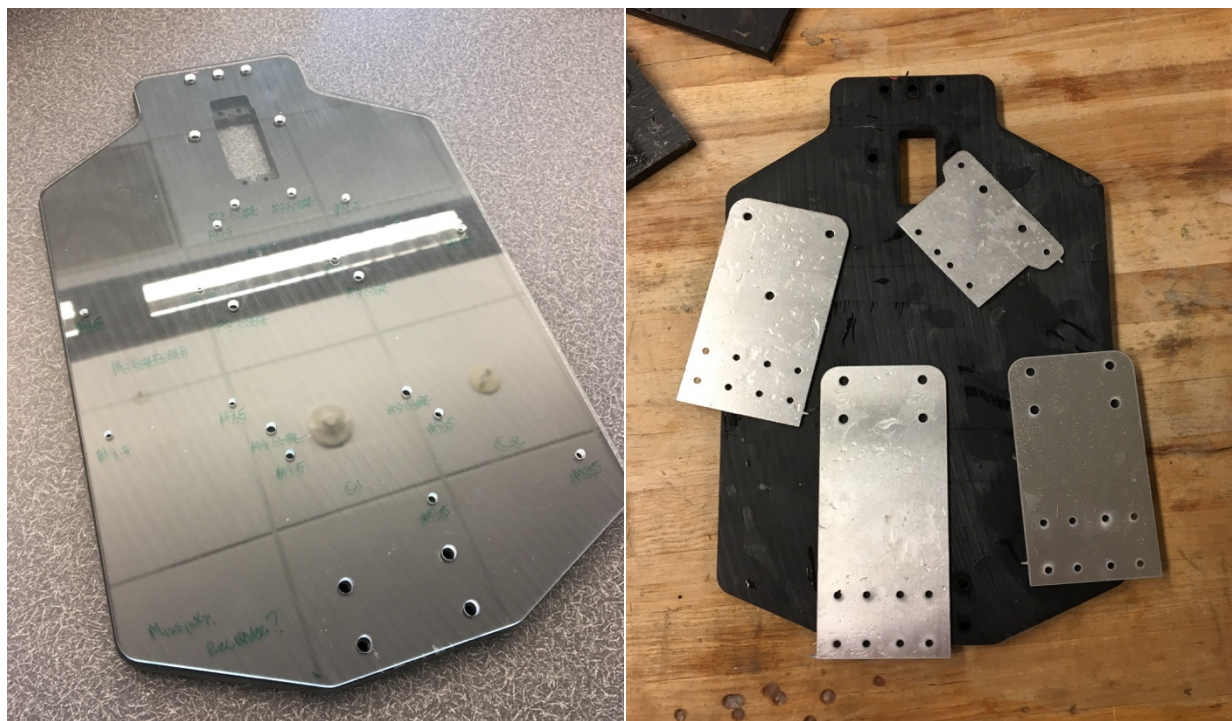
Chassis template made with the laser cutter and mounted to the chassis for hole locating (left) and 2D profiles cut on water jet for chassis and chassis mounts (right).
